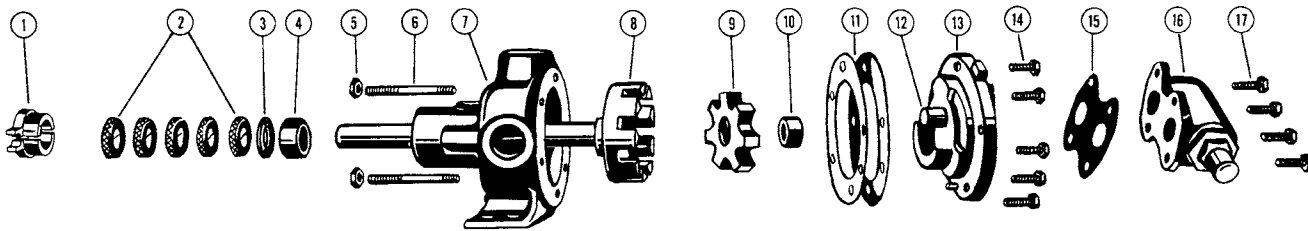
EXPLODED VIEW MODEL G32 PUMP
